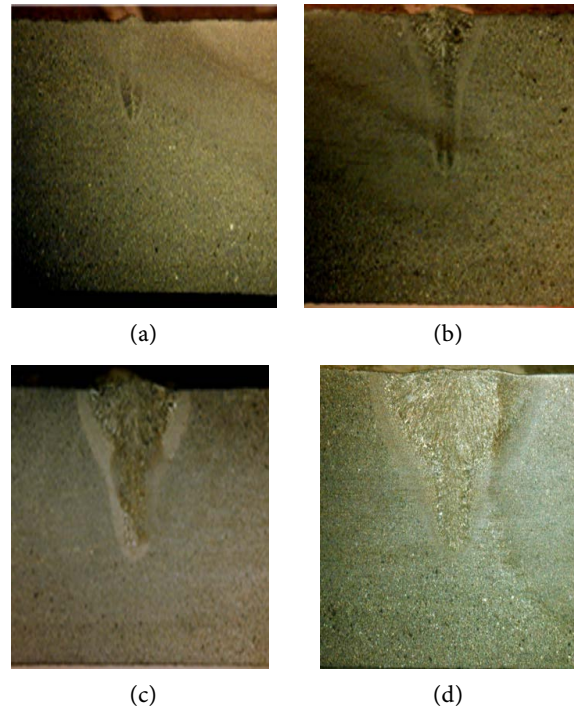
Macrostructure on cross-sections of the bead-on-plate welds produced on 10.0 mm thick plates of JIS G3106 SM570 by laser power of 5 kW, defocusing distance -0.5 mm, shielding gas flow rate of 30 L/min and variable welding speeds of (a) 3 m/min, (b) 2 m/min, (c) 1 m/min, (d) 0.5 m/min.
